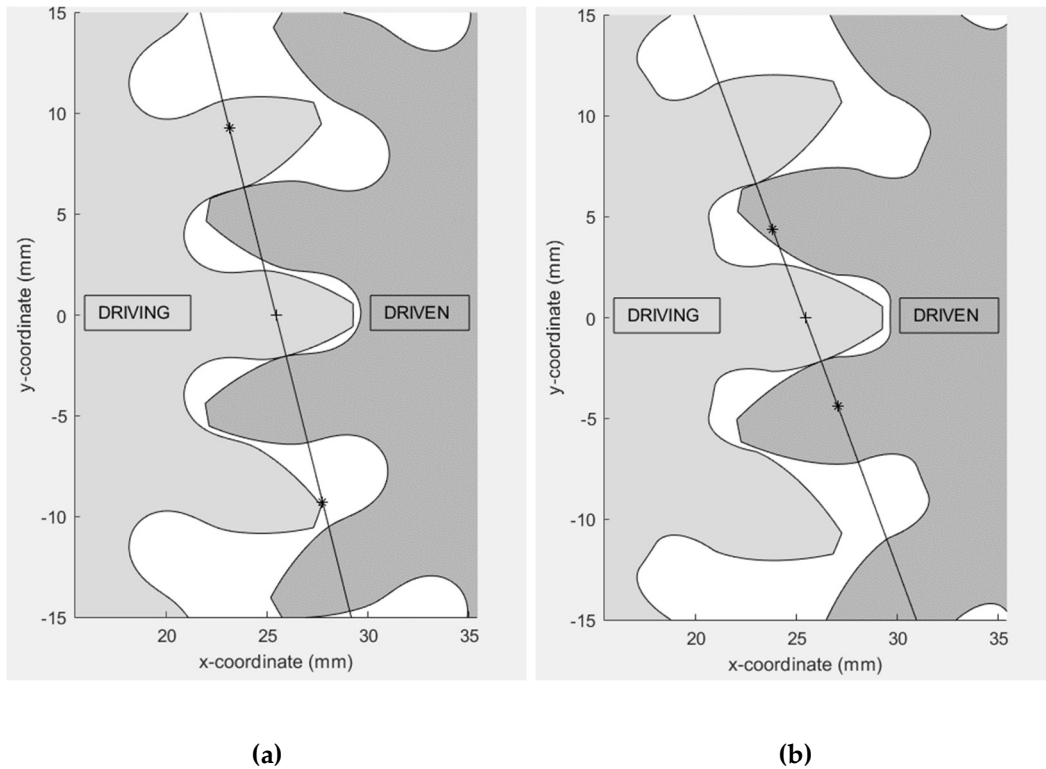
Gear meshing: old prototype pump with 18 teeth/gear (a), new design with 16 teeth/gear (b)
